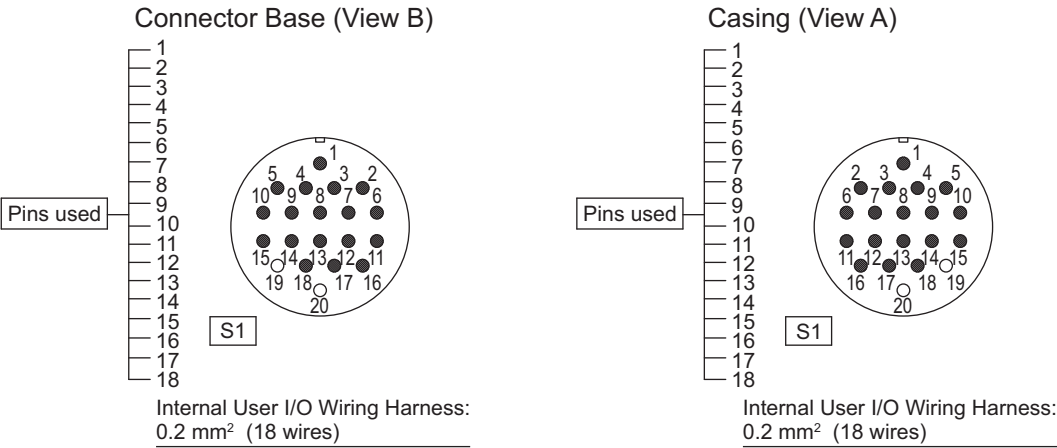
Connectors for Internal User I/O Wiring Harness and Air Hose (with the Manipulator Cable on the Bottom)
